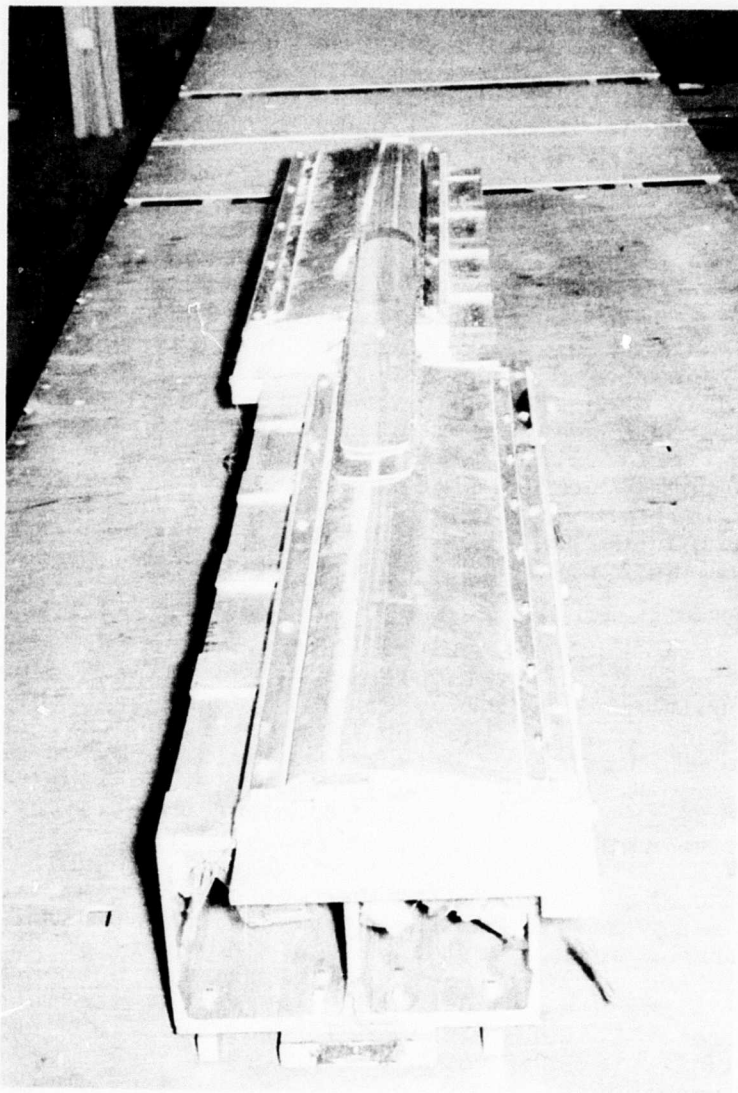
Rotor Assembly on Completion of Final Autoclave Cure with Diaphragm Removed.
